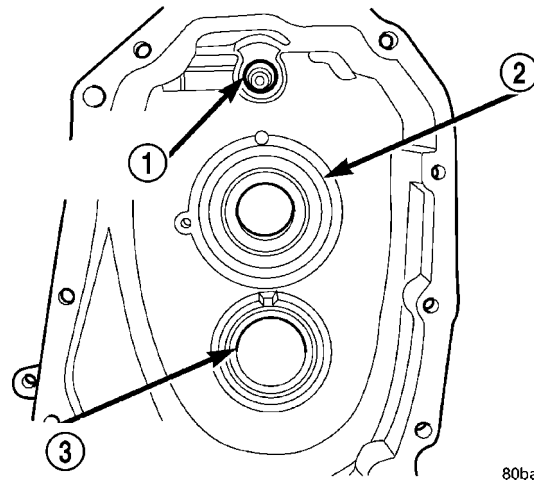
INPUT SHAFT AND COUNTERSHAFT BEARING
